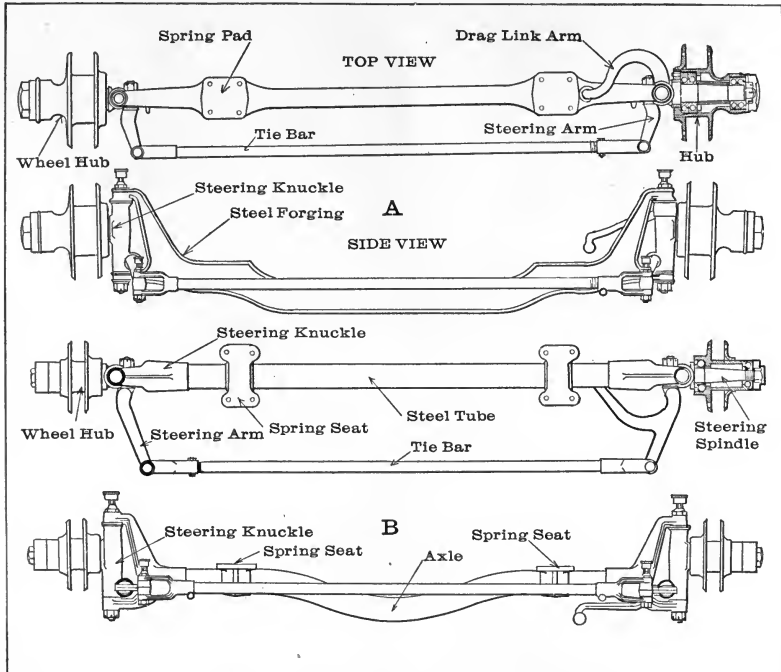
Typical Front Axle Types. A—Forging of I Section. B—Tubular Axle.
